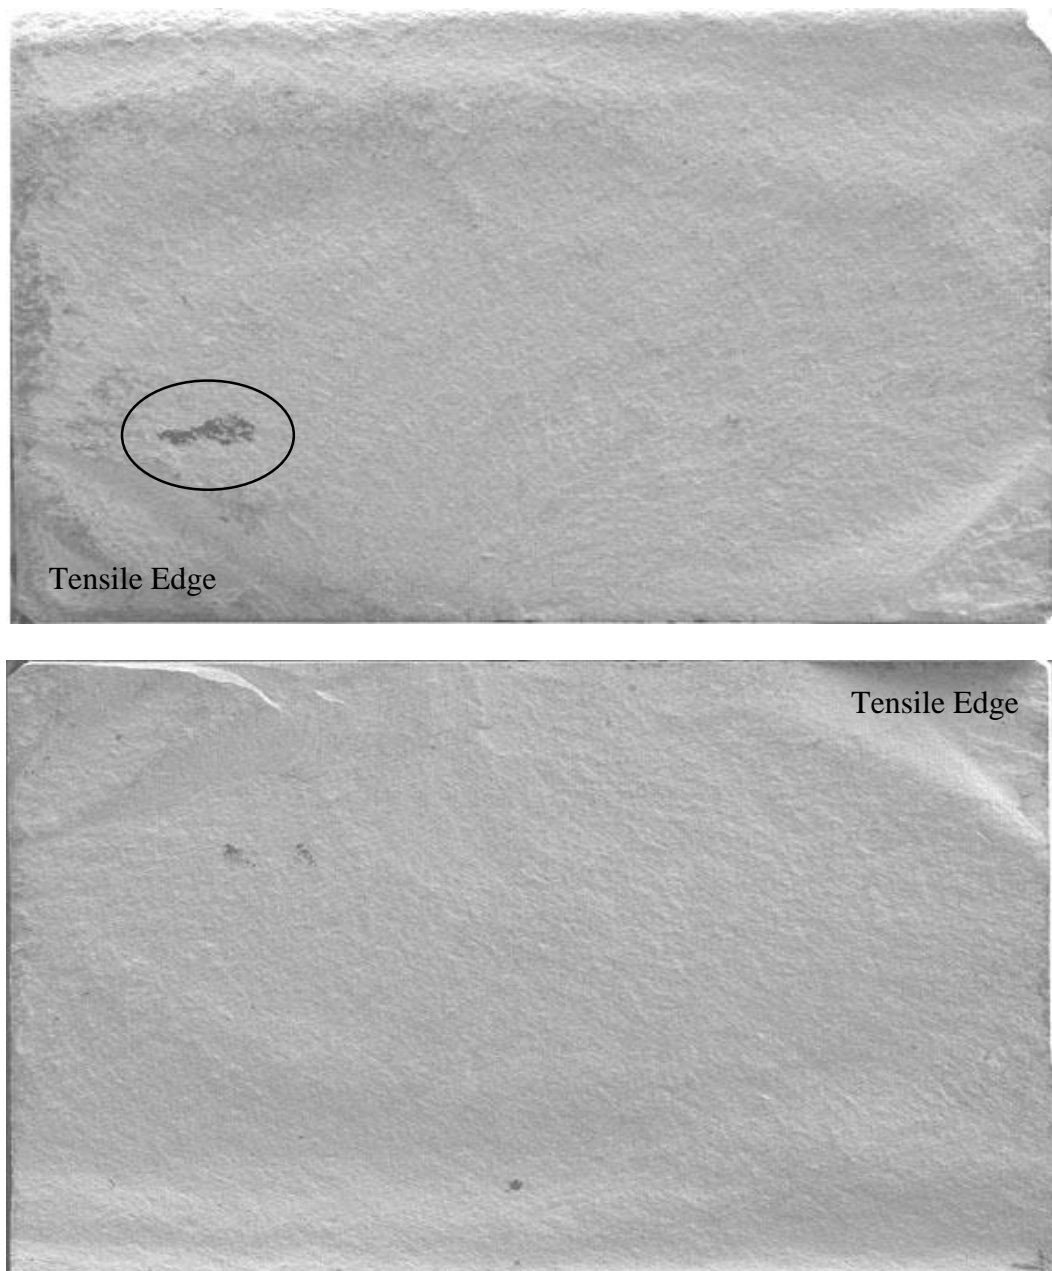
Bar III, fracture surface end faces; composite image, 200× magnification
